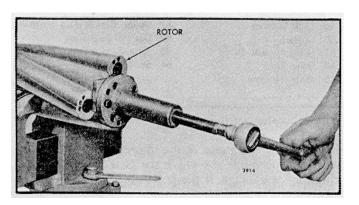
Removing Oil Seal Ring Carrier from Blower Rotor Shaft with Tools J 6270-2 and J 6270-31
